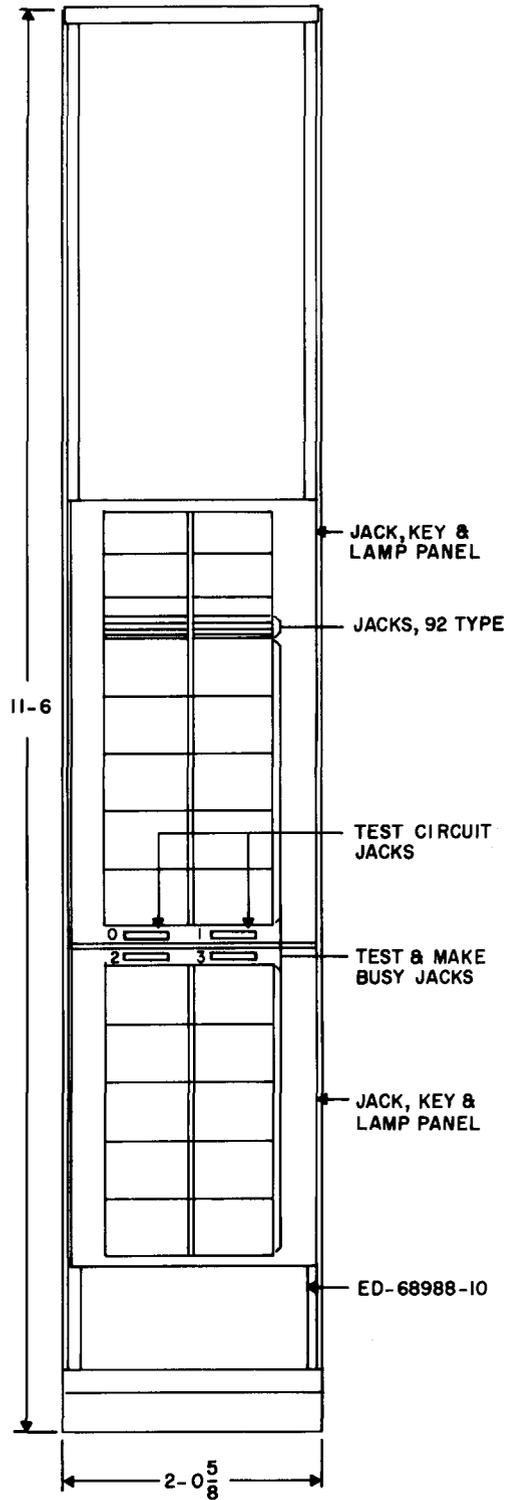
Trunk Test and Make-Busy Jack Bay
